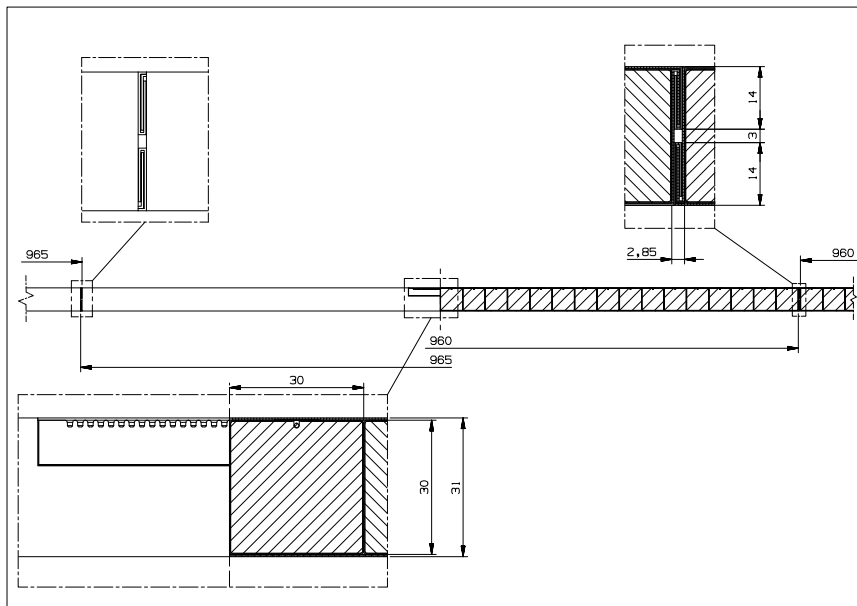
Assembly of a plane out of the basic units, details of the crimping of the two aluminium sheets of nearby basic units. The figure is split in two halves representing the front view and a cross section.
